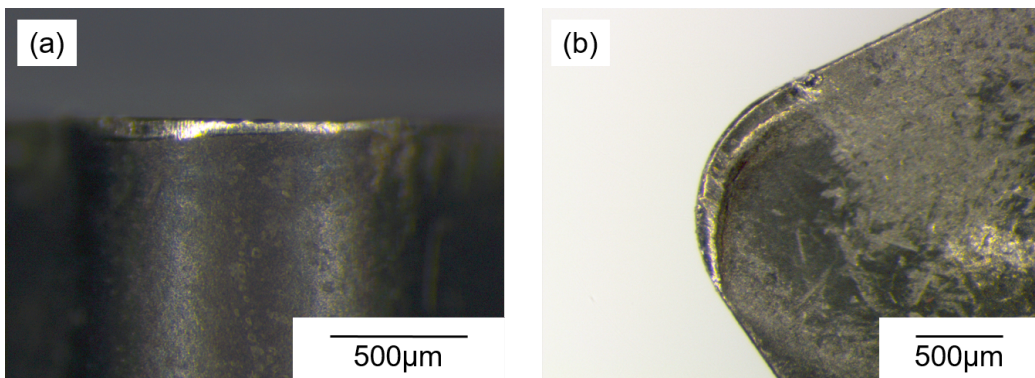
Microscope images showing the degree of tool wear after trial 2.2.4 on billet 4.1. Showing (a) the flank face and (b) the rake face.
